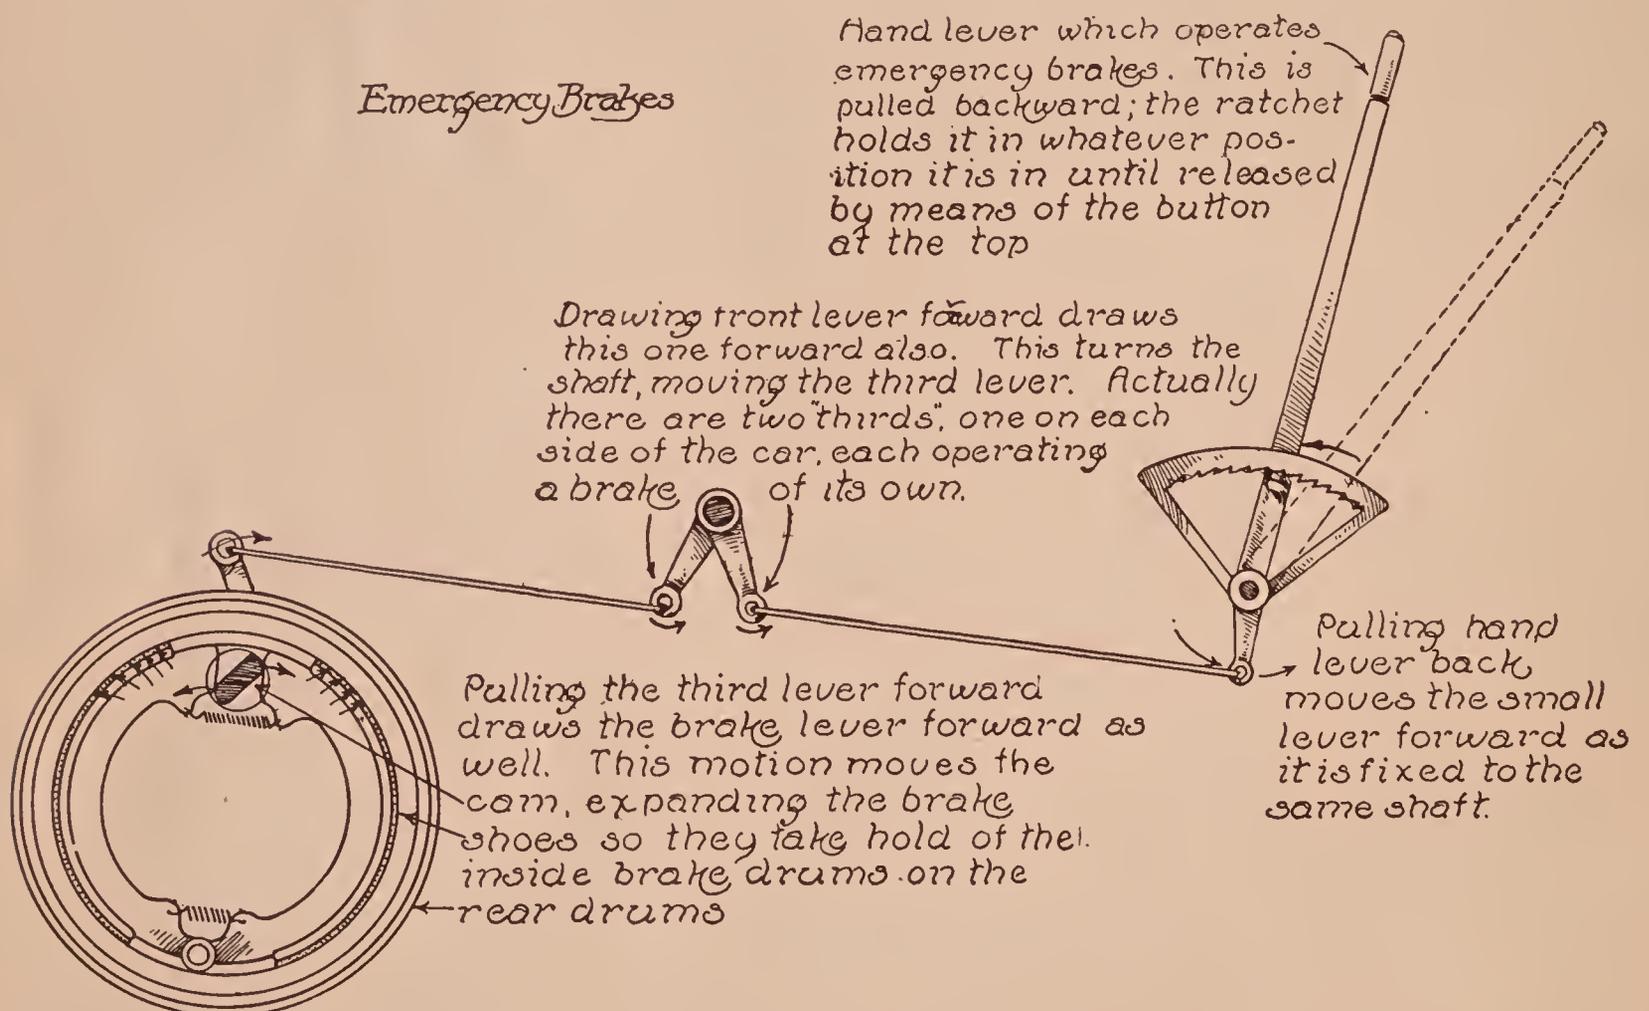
Sketch indicating the components and method of operating the usual form of emergency brake.
